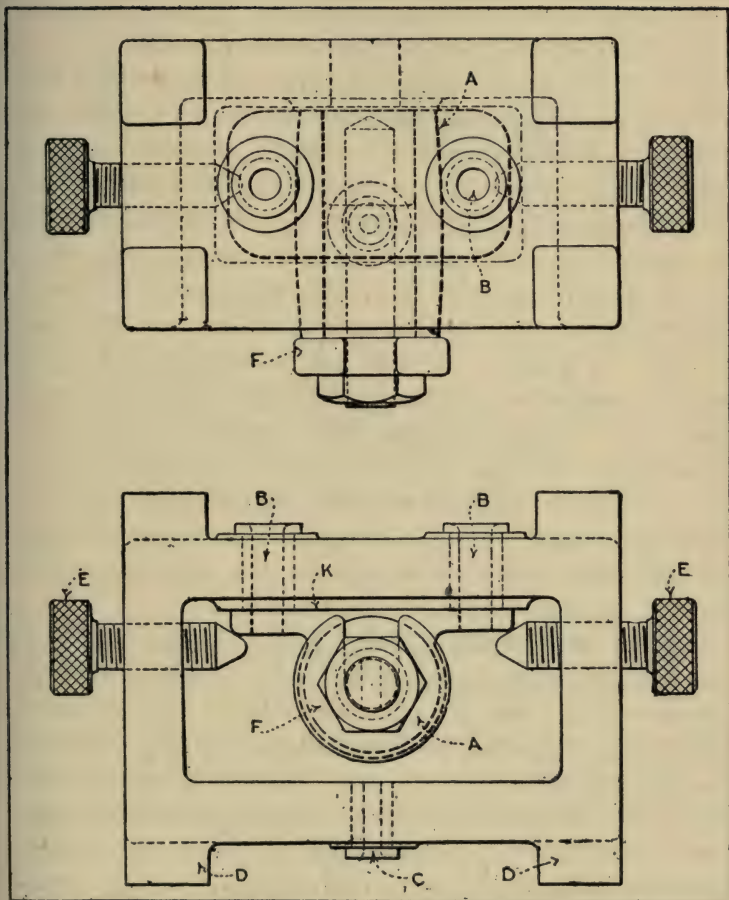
DRILL JIG FOR A ROD-SUPPORTING BRACKET
